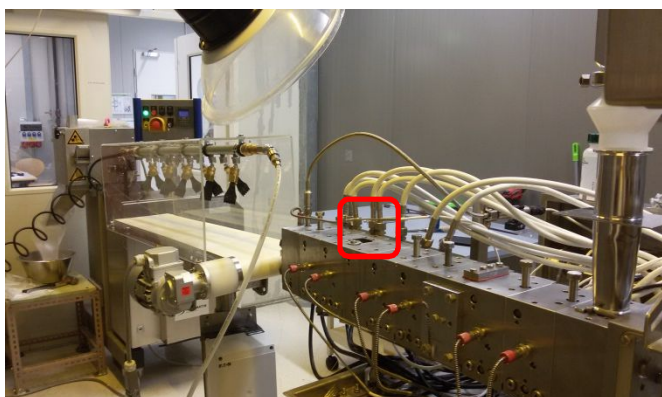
Extrusion line (2) – open barrel element 8 is marked in red (RCPE)
